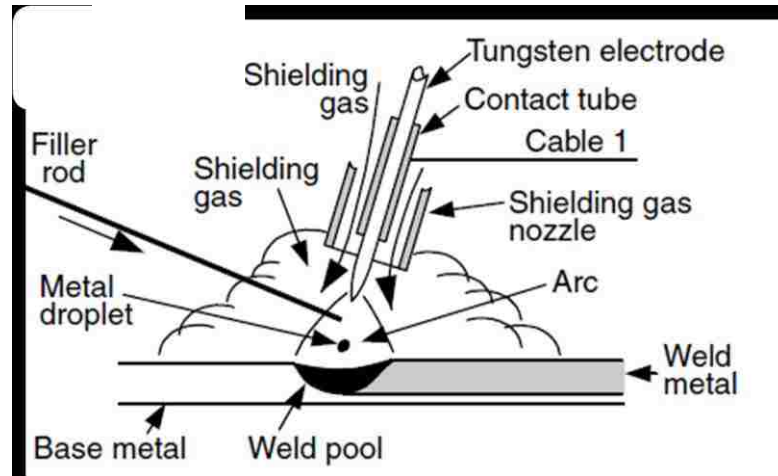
Gas tungsten arc welding. [20]
